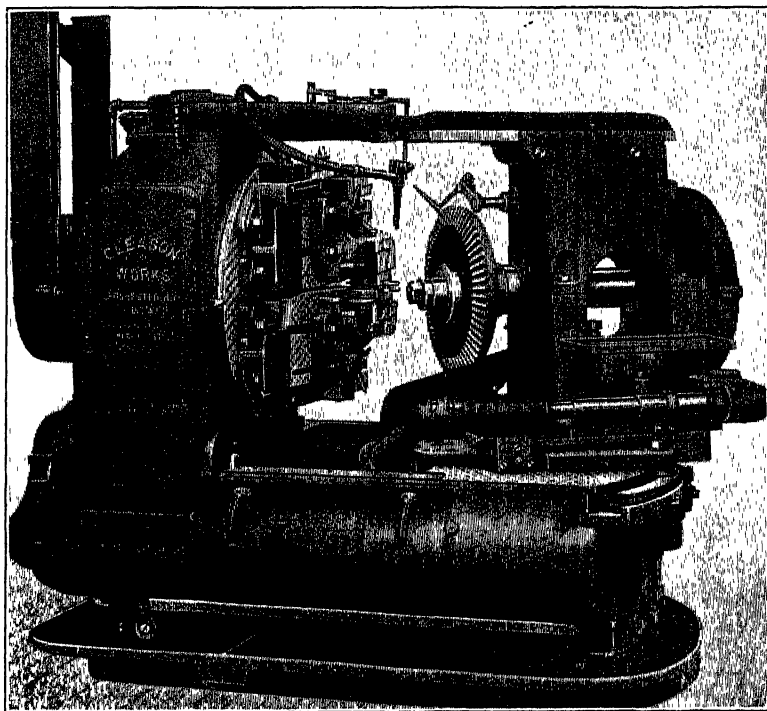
Straight-Tooth Bevel-Gear Generator.
